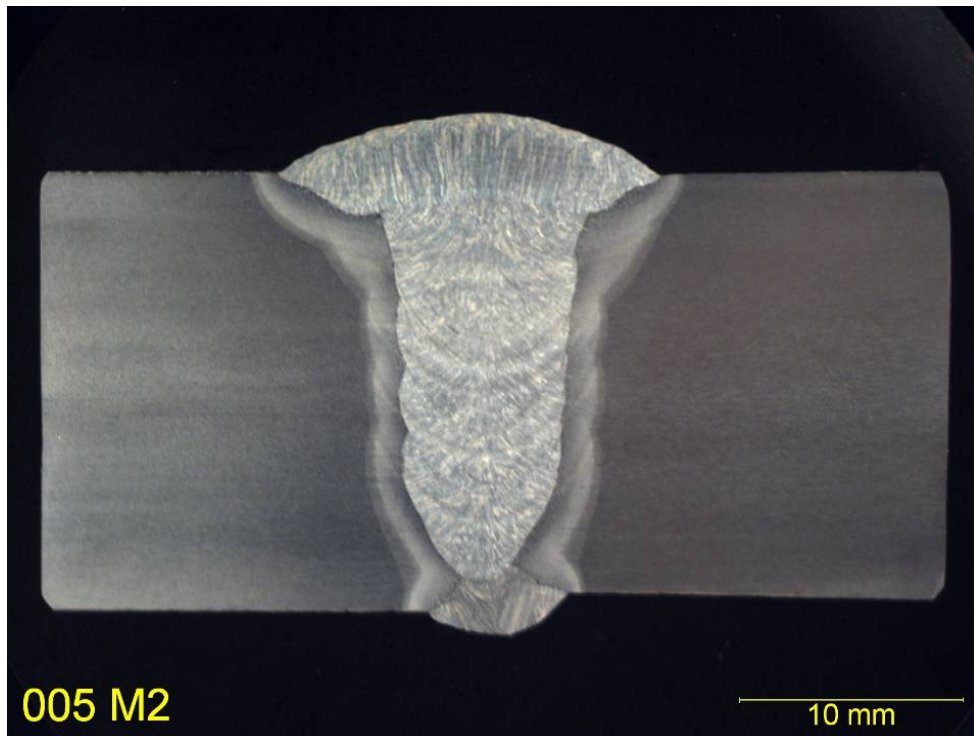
Photo-macrograph Showing Cross-section of Weld B5
